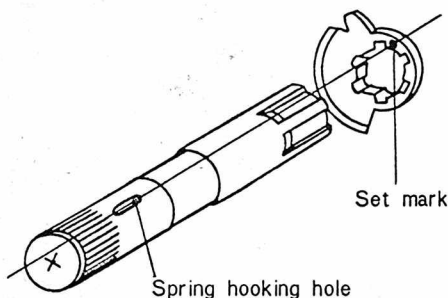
Mark on kickstarter gear should be aligned with spring hooking hole as shown.
